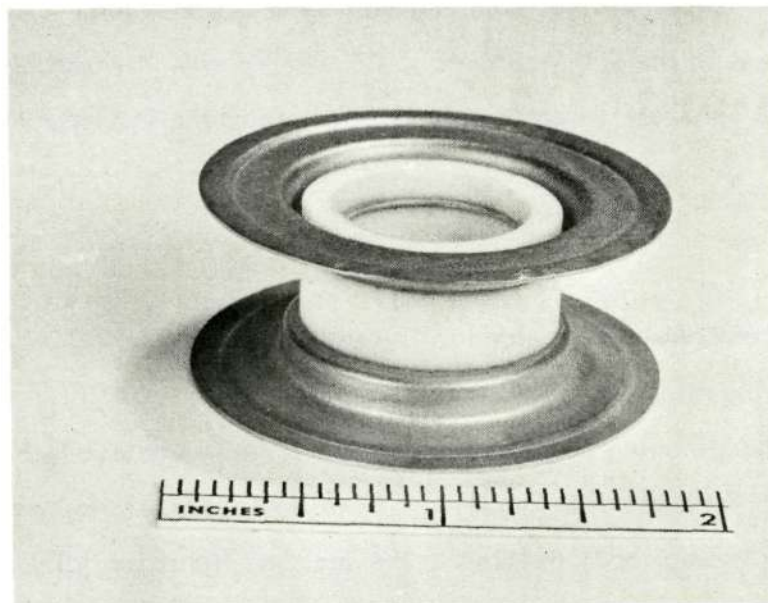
Active Metal Brazed Seal (Nb-1Zr to Alumina)
